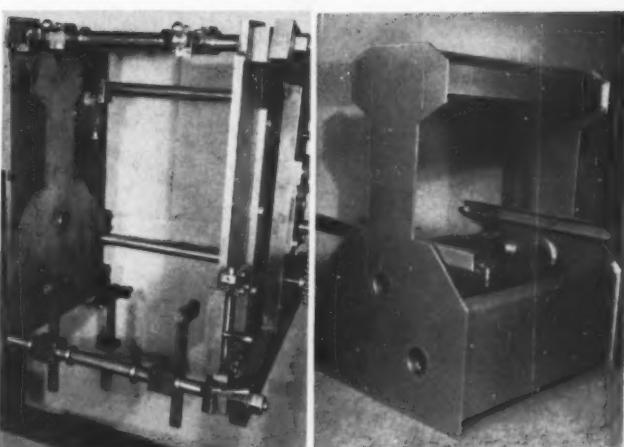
Left—Welding fixture for final assembly of frame requires little handling in locating and clamping principal parts, produces perfectly square and level housing
